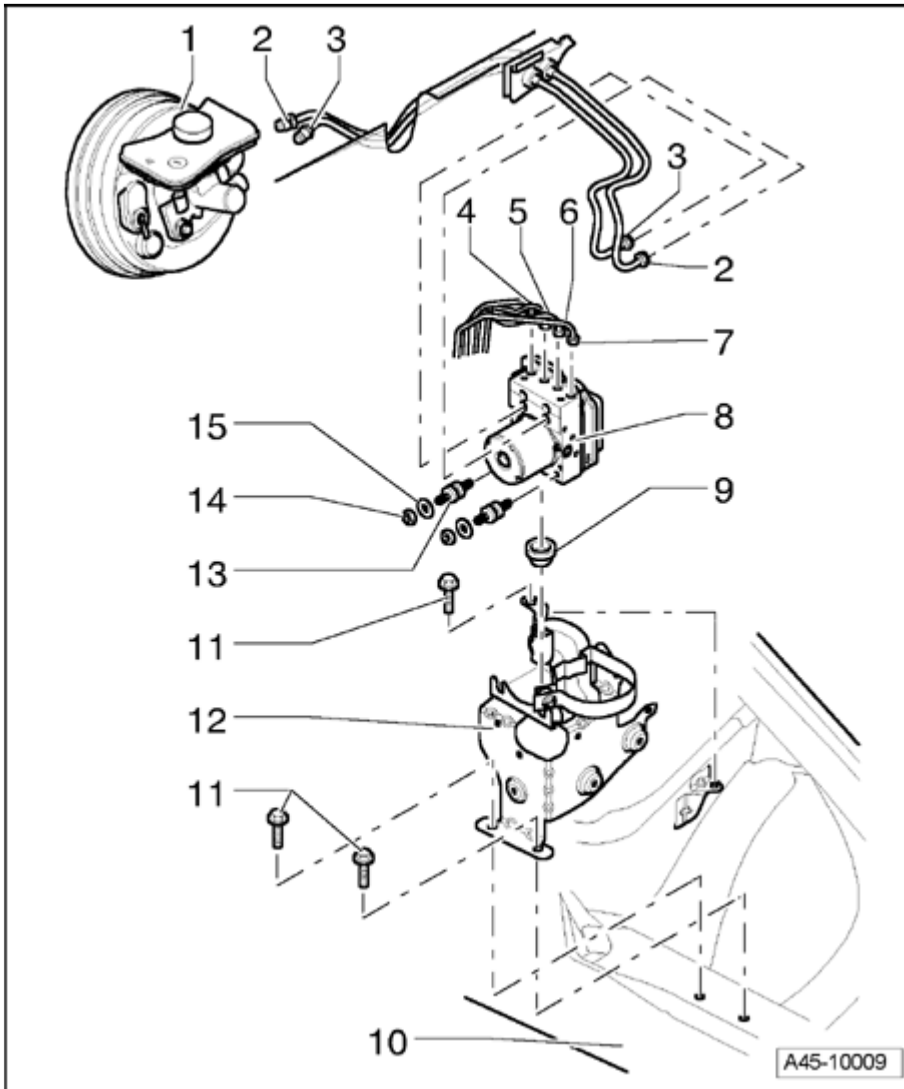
Exploded View Of Hydraulic Unit And Brake Lines
